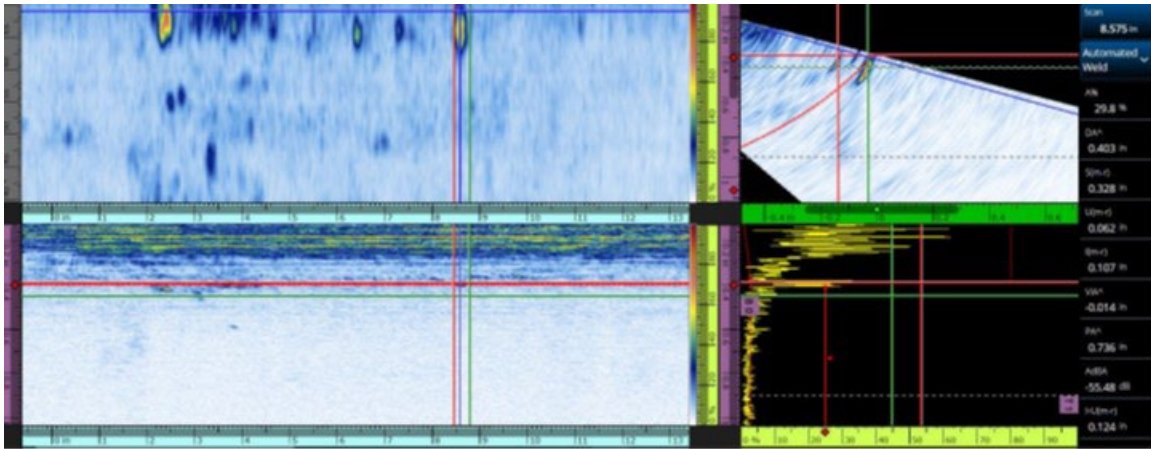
PAUT indication of defect at Location D in fillet weld test panel MGL-10 from ID-raster scan
